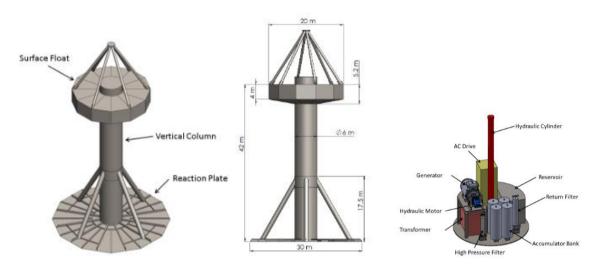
RM3 DEVICE DESIGN AND DIMENSIONS
